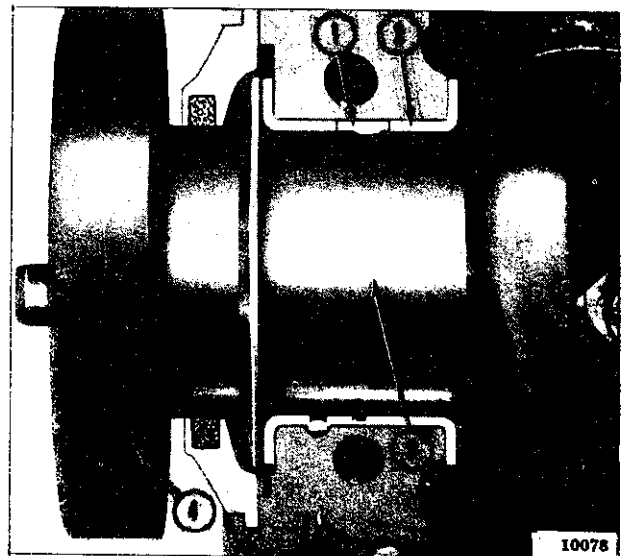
REMOVING MAIN BEARING UPPER HALF WITH ENGINE INSTALLED
